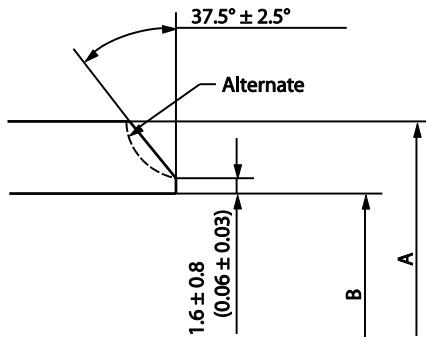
ASME B16.25 – weld bevel details for GTAW Root Pass with wall thickness from 3 mm up to 10 mm
